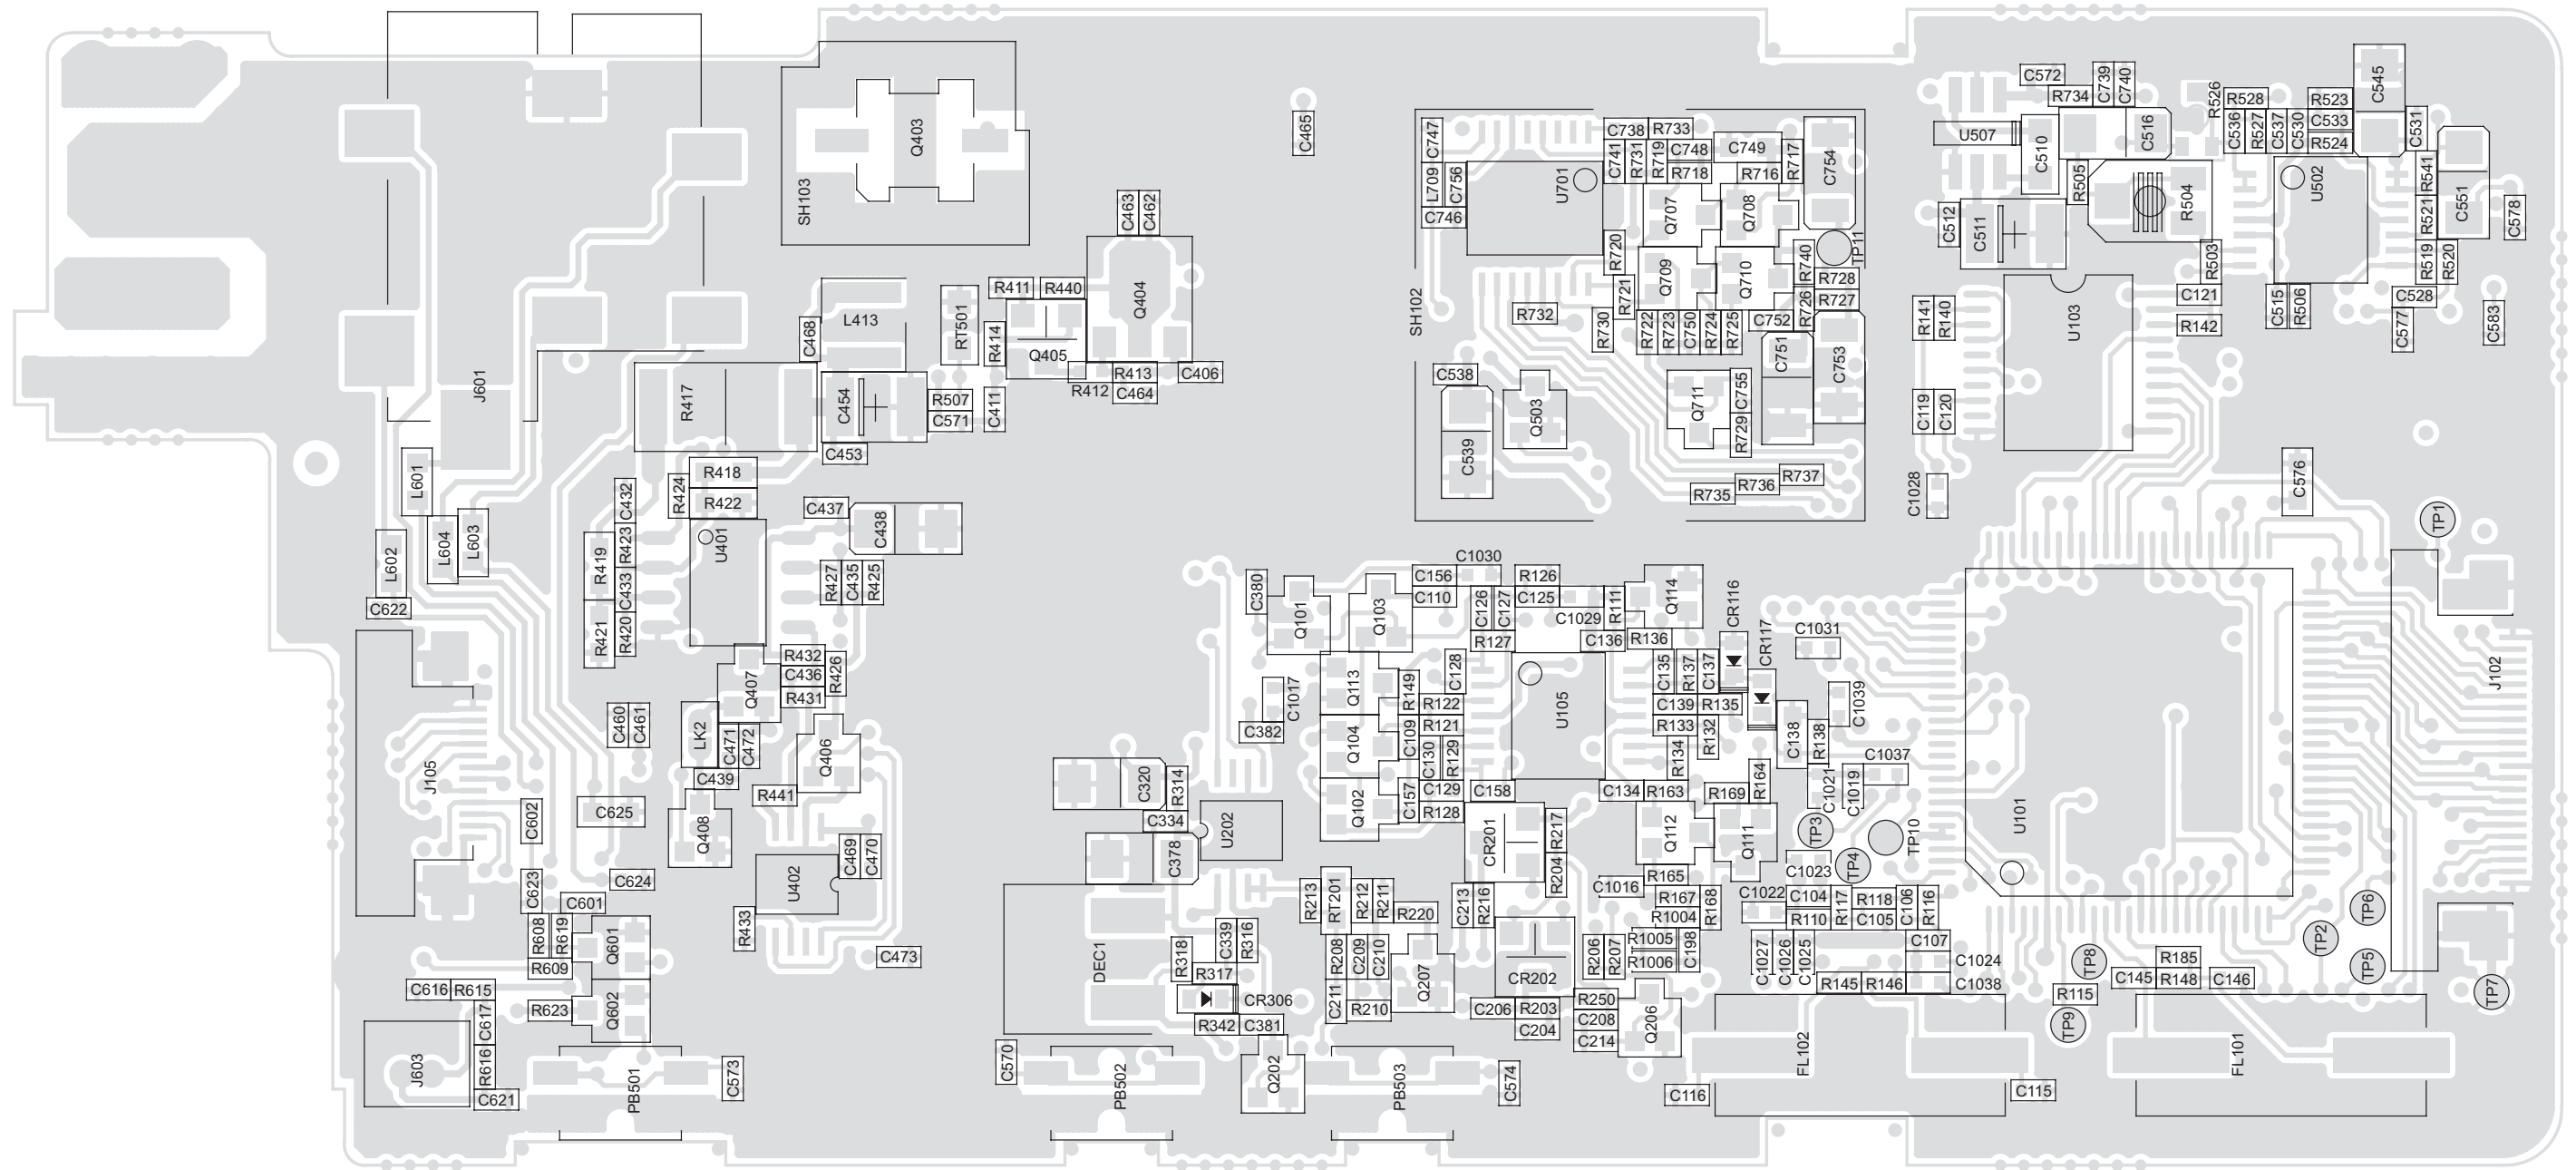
UHF2 (435–480 MHz) Mainboard Top Side: PCB No. E11-0767-0
